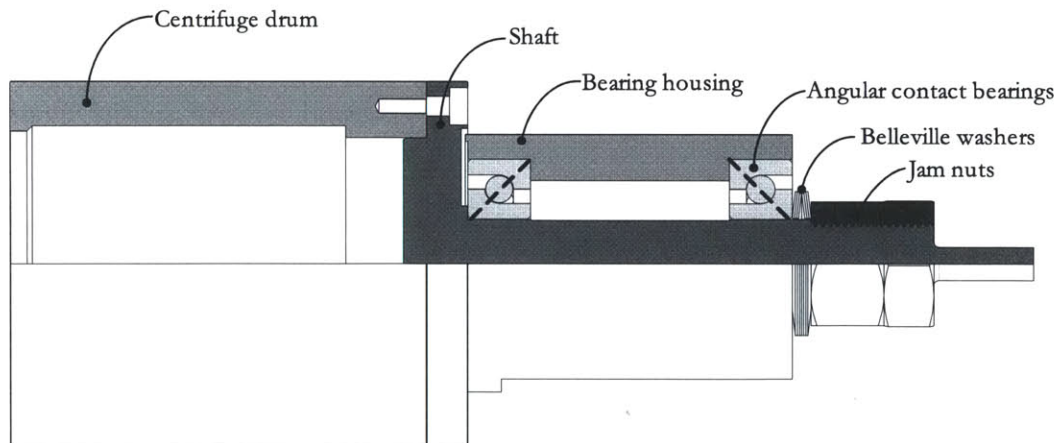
Centrifuge bearing design. Back-to-back angular contact bearings were used to constrain the shaft axially and radially. Belleville washers provided a compliant preload between the jam nuts and washers to accommodate large thermal expansions during heating of the centrifuge drum. The centrifuge drums are interchangeable on the shaft.
